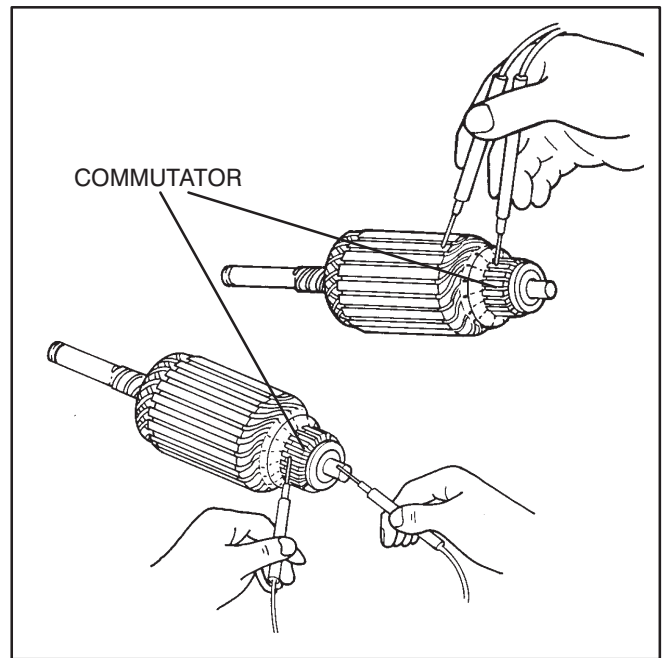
CHECKING ARMATURE WINDING INSULATION
